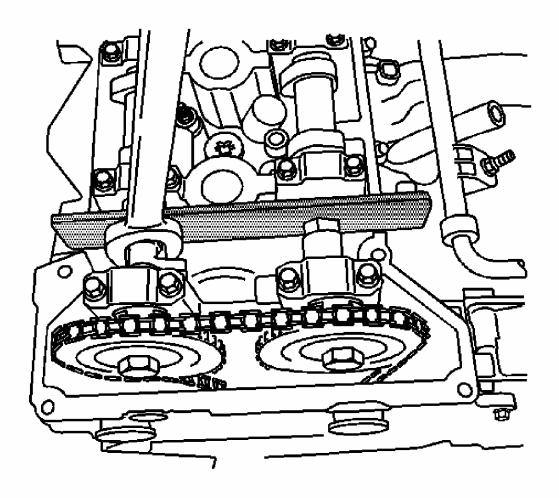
Securing Camshaft Using An Open End Wrench Courtesy of GENERAL MOTORS CORP.
